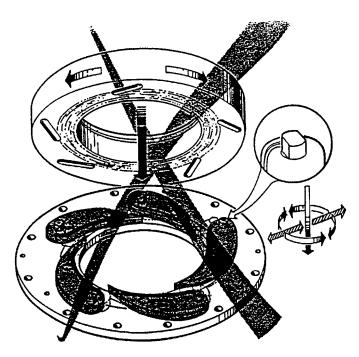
Expander nozzle adjustment via sliding pin engagement.
